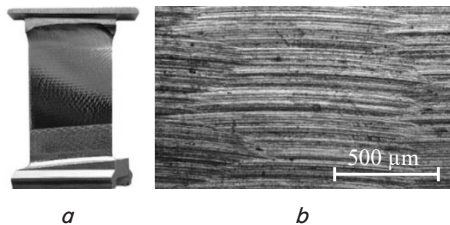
Compressor blade surface quality after high-speed milling: *a* – blade tip; *b* – milling lines
